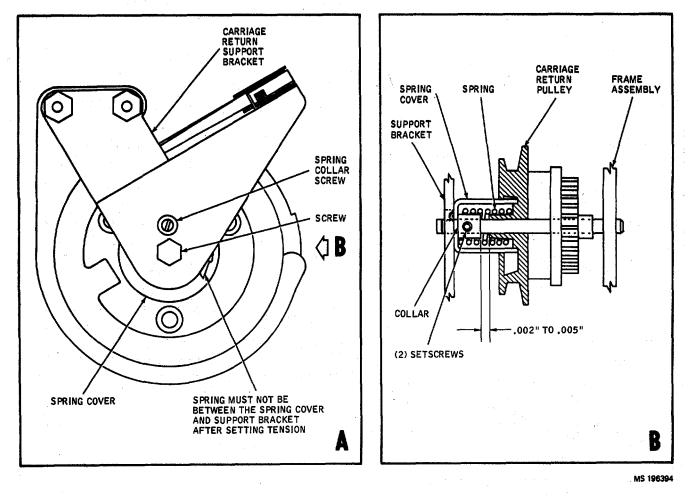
Carriage Return Clutch Pulley Adjustment
